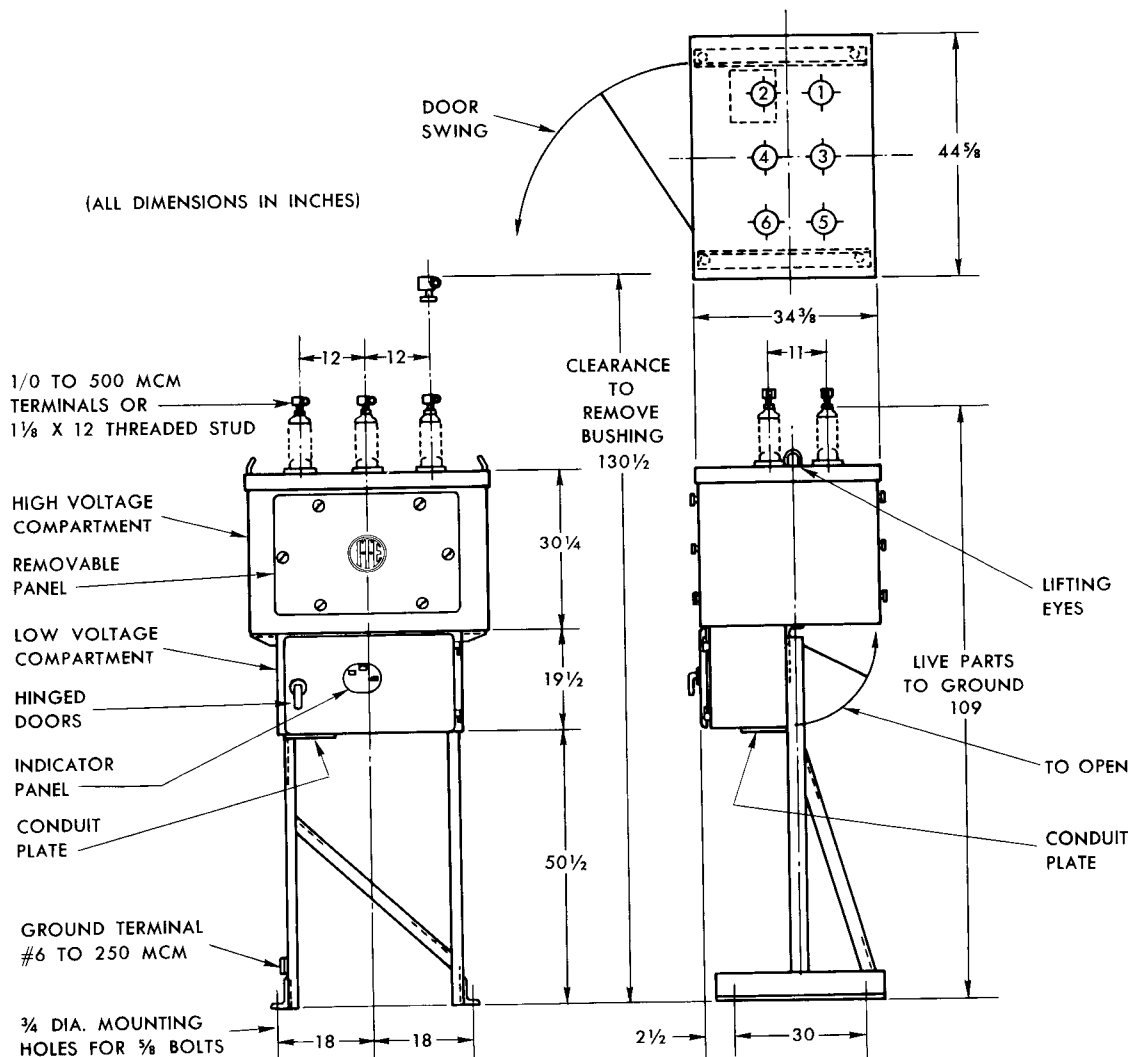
Metal-Housed Recloser (Model VRM) Assembled for Station Mounting.
